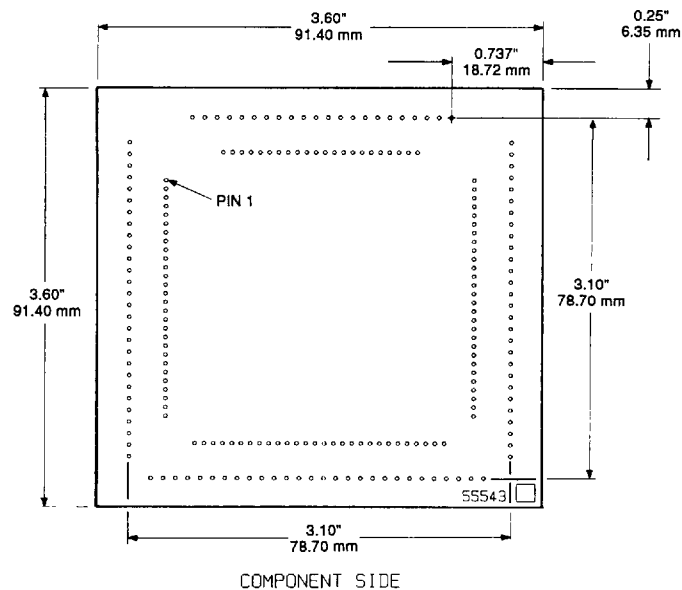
DD-03200 ADAPTER BOARD MECHANICAL OUTLINE
